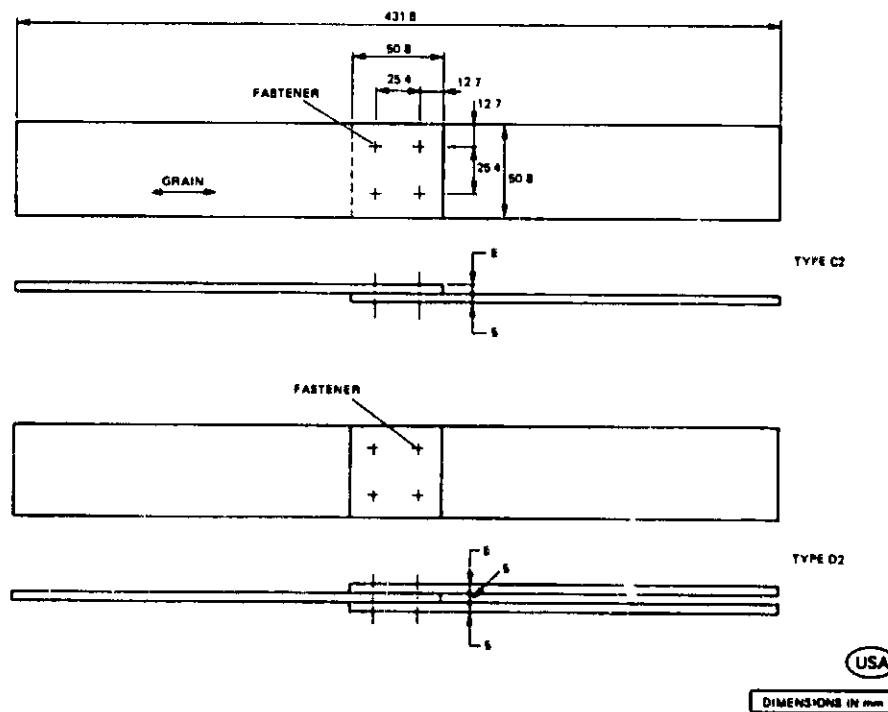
High load transfer lap joint specimen, type C2, and its double shear equivalent, type D2 - USA
